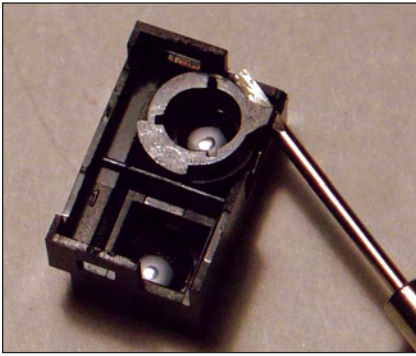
Using a small jeweler's screwdriver to slowly work the lens mount out of the forward lens housing.
